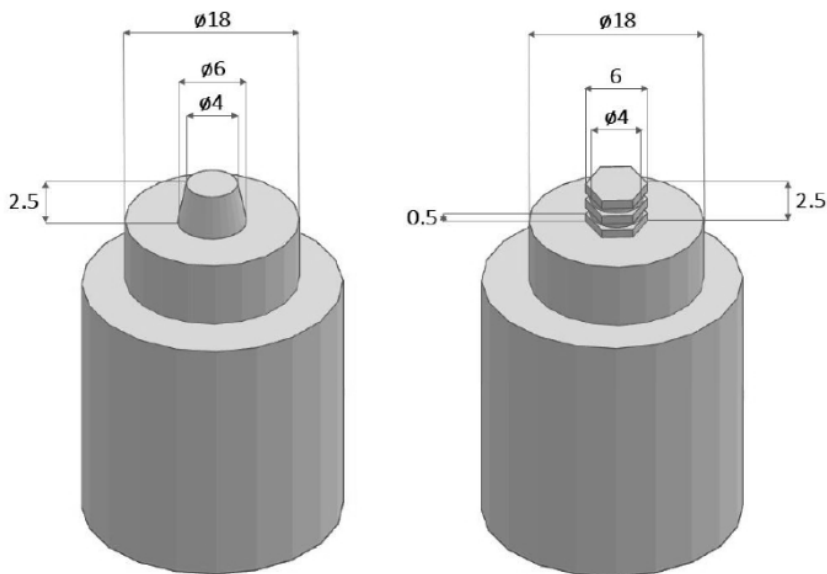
Schematic illustration of the geometry of the tool used for FSW of AA6082
